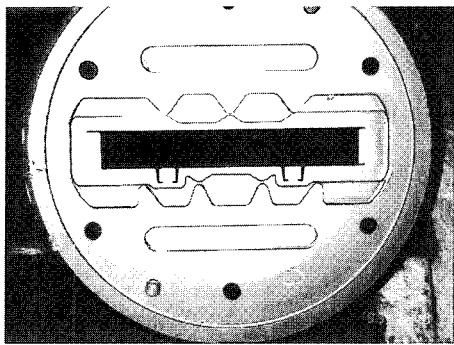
Extrusion die (welding chamber, feeder and die bearing)
